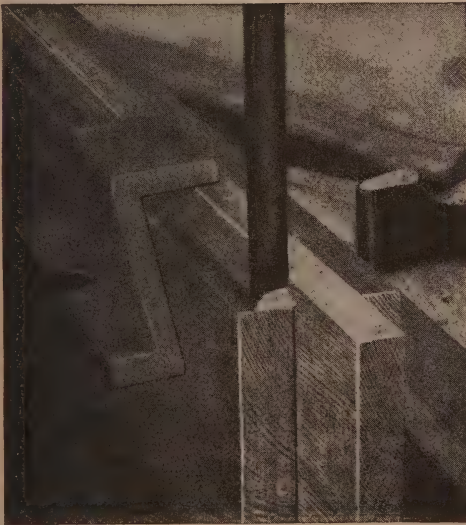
Scribing a Joint with Gouge; the Wood is Ovolo Moulded
